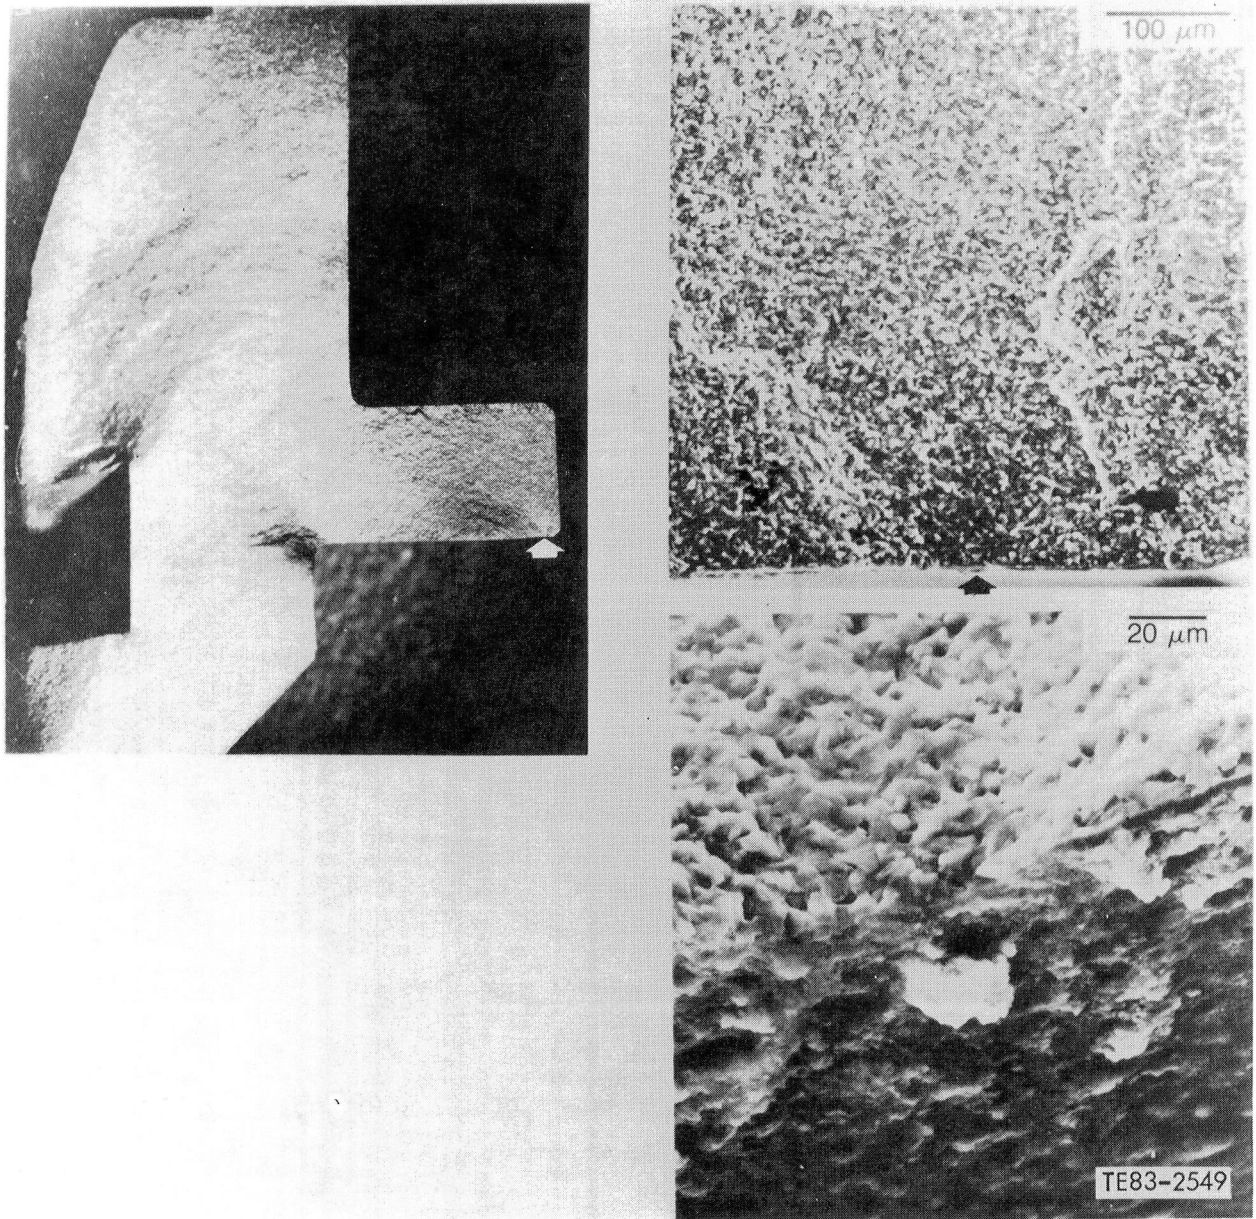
Fracture surface, inner vane support ring for engine C-4, TD14.
